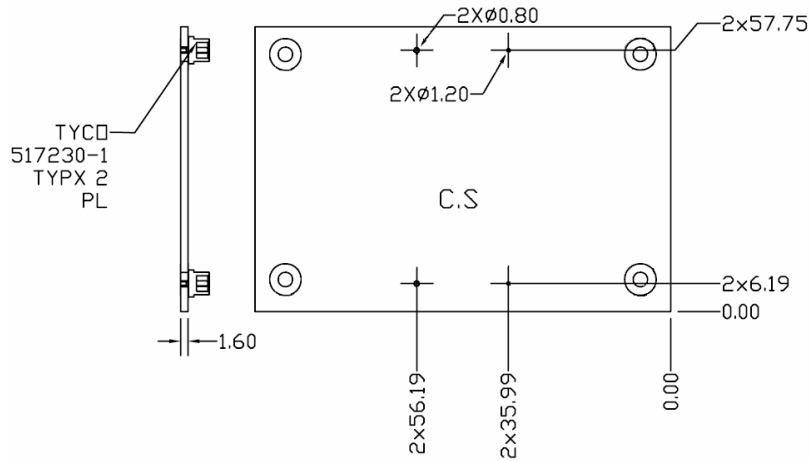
Mechanical drawing of the GPTiMe SMT version – top and side view
